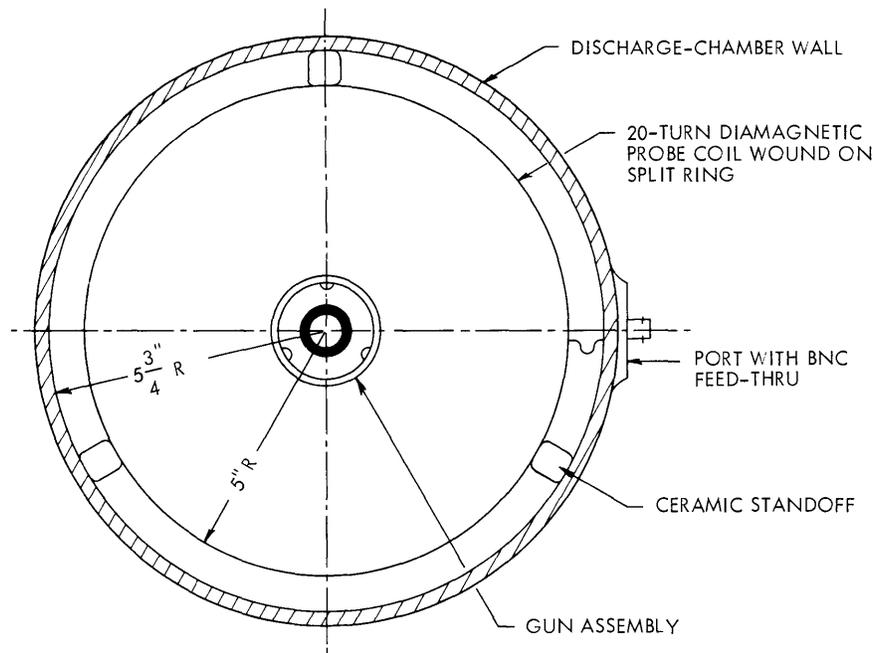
Diamagnetic probe — axial view from collector end.
